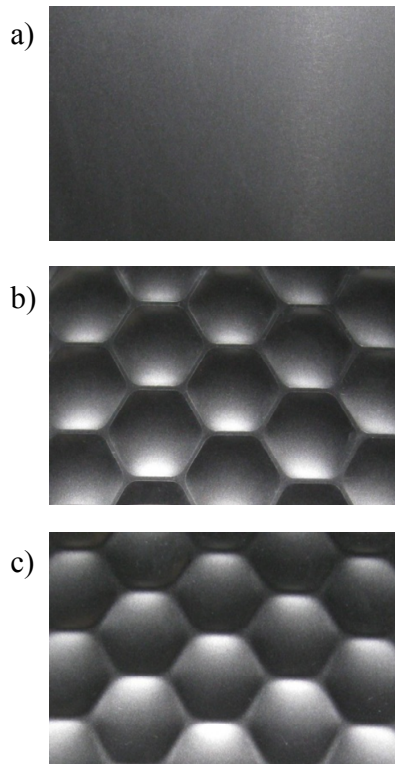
Corrosion samples 150x100x0.7 mm; a) smooth sheet metal; b) structured at the sheet metal structure location “positive”; c) structured at the sheet metal structure location “negative”
